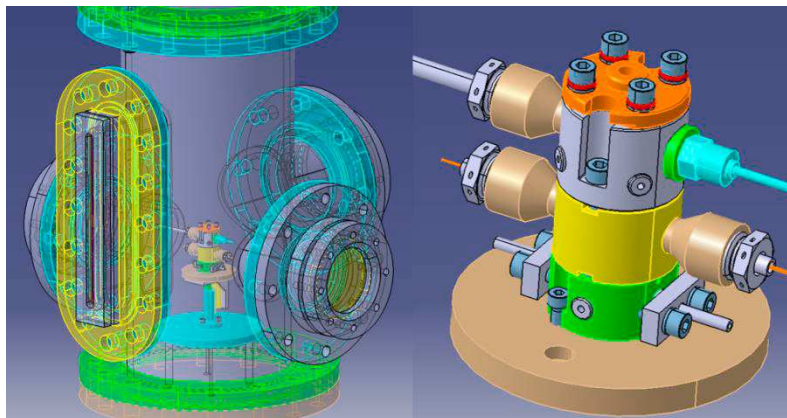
Thruster experimental assembly inside the vacuum chamber
